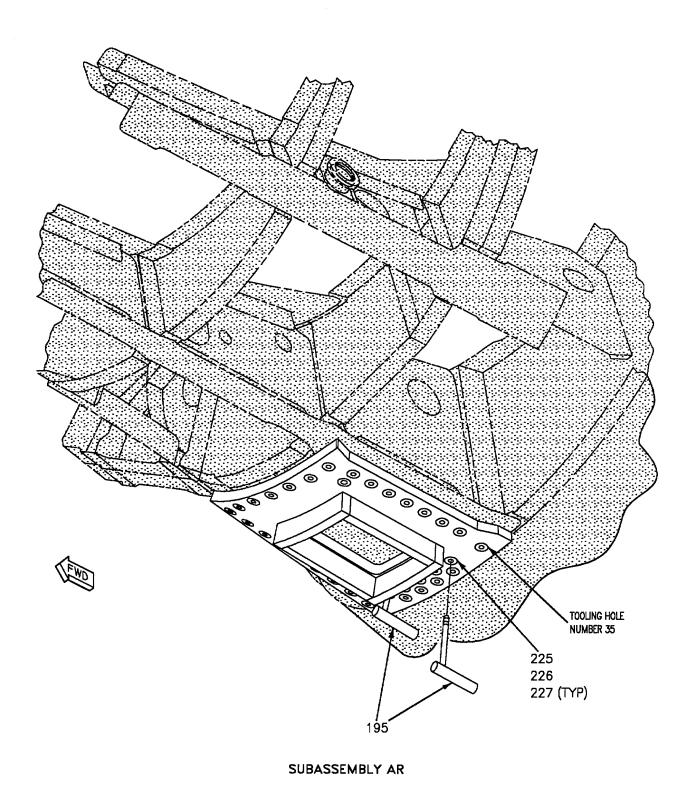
Locating and Drilling Attach Hole Pattern in Lower Inlet Substructure for Access Cover 74A322680, Between Y442.000 and Y453.000, After Inlet is Installed
